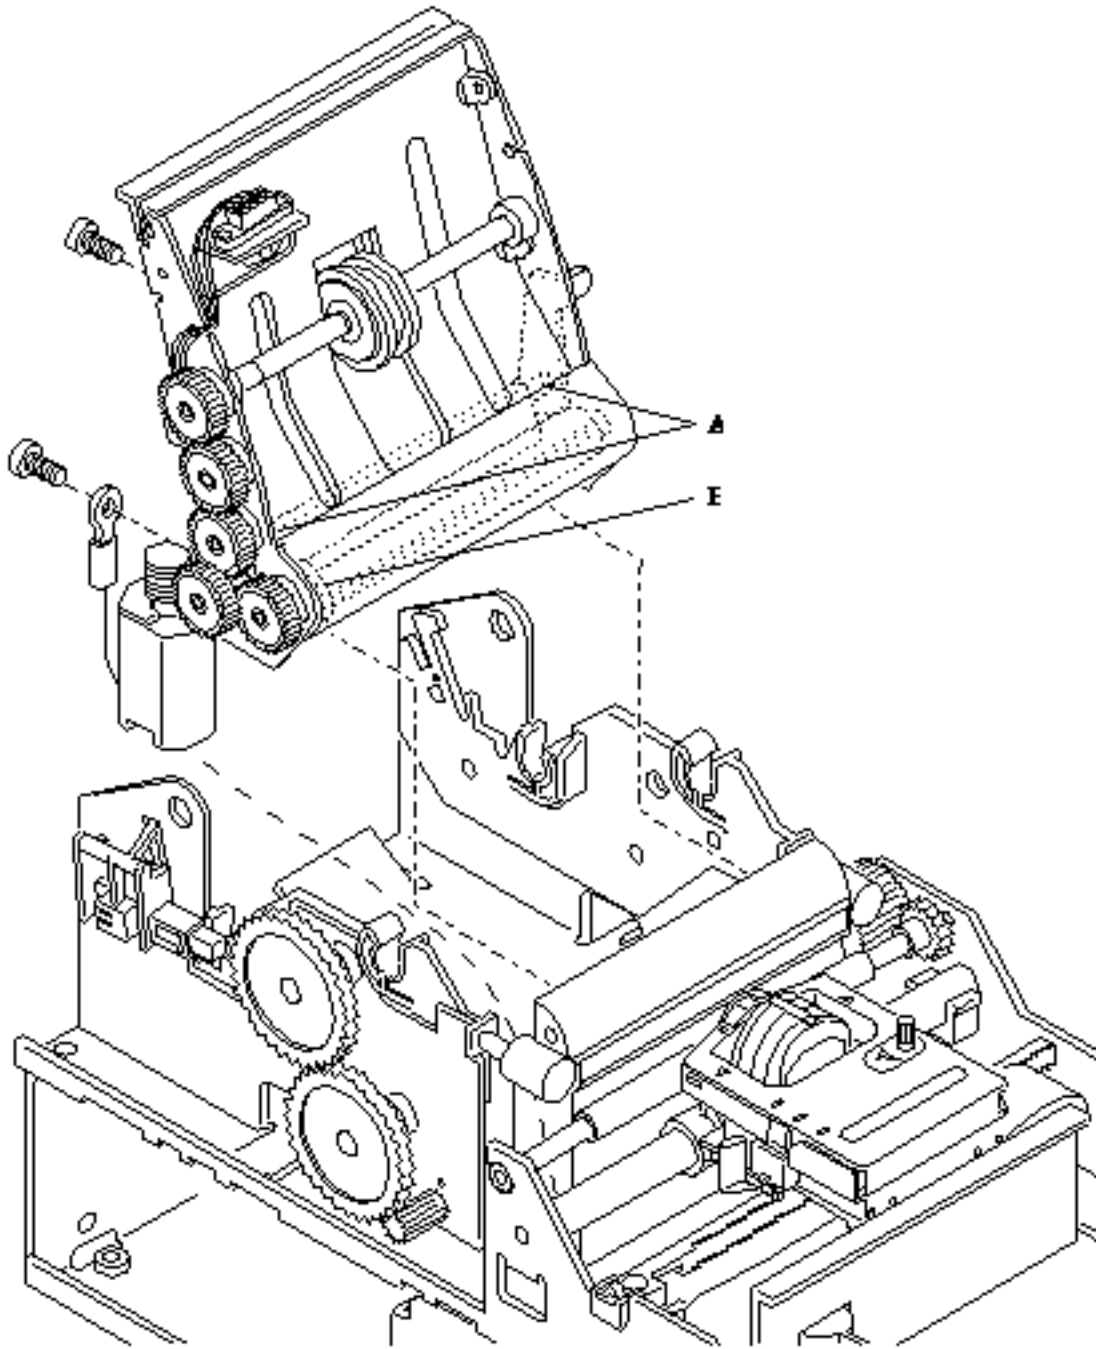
Lubricating the Transport-Auto Cutter Assembly
